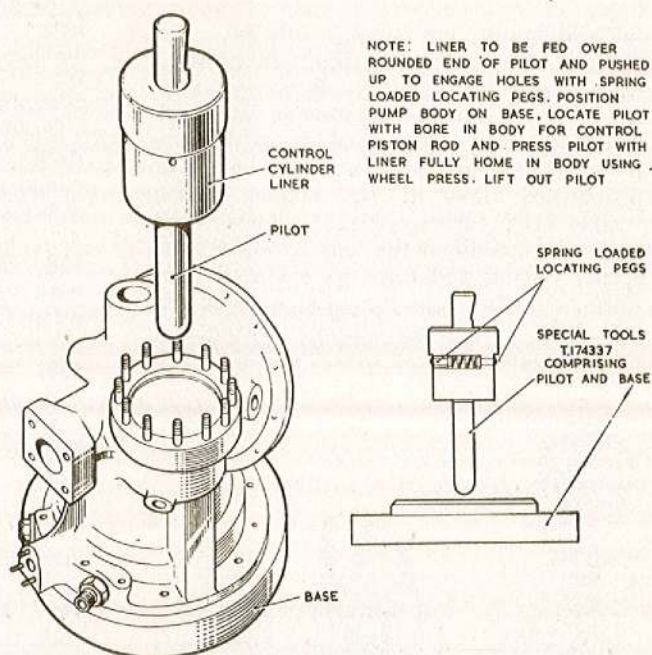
Inserting control cylinder liner into pump body, using tool T.174337
